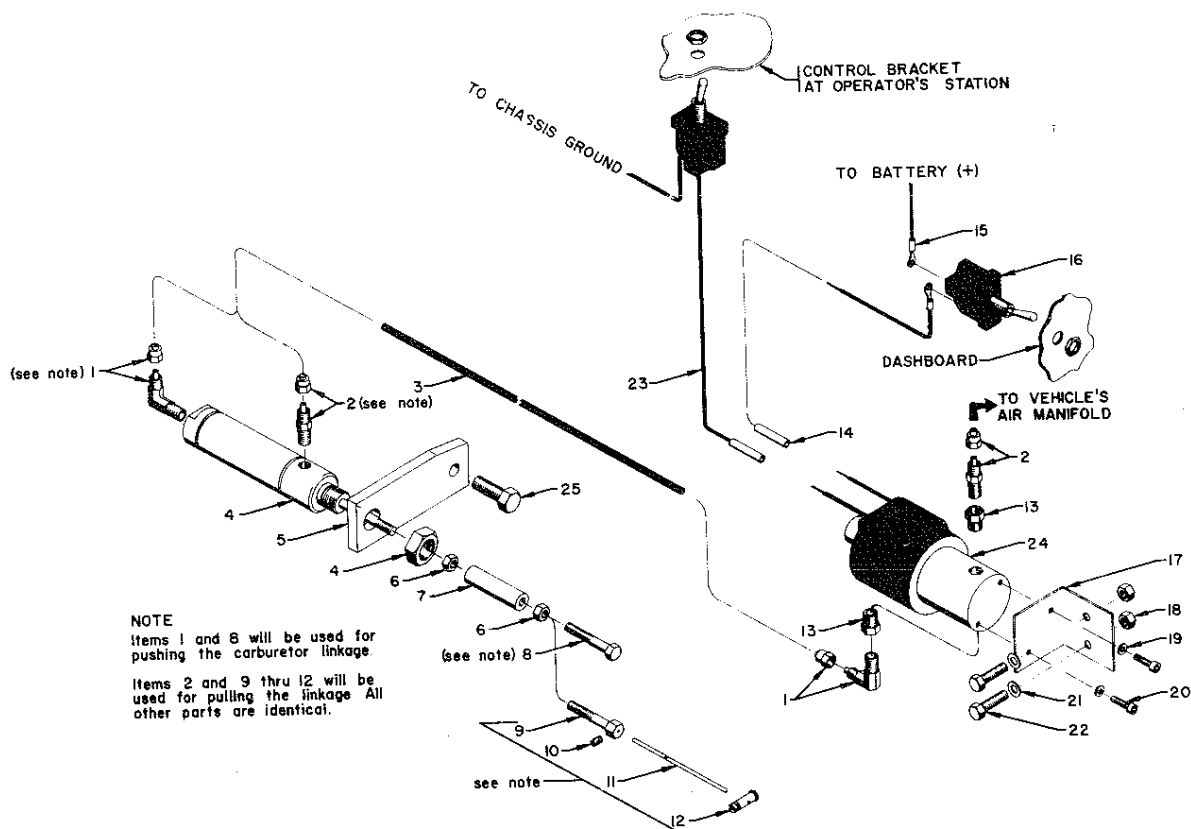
Electric/Pneumatic Throttle Control (Part Number 31702944)
